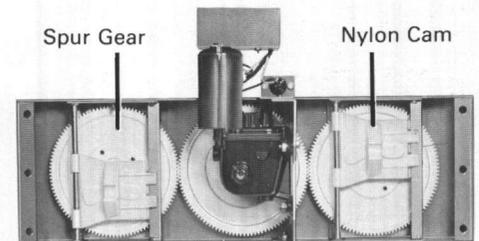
Rear View, 150-1000 Ampere Switch Mechanism
